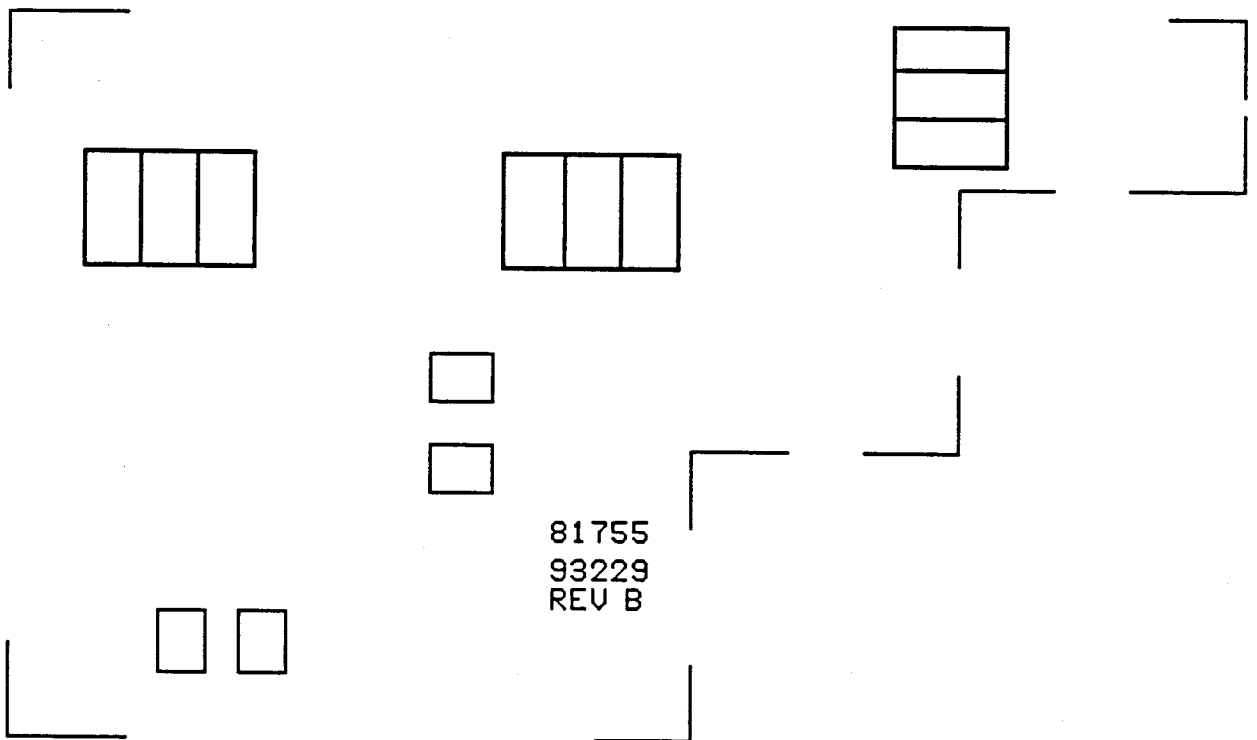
24 PLATE CONNECTOR BOARD COMPONENT LAYOUT (81755)
